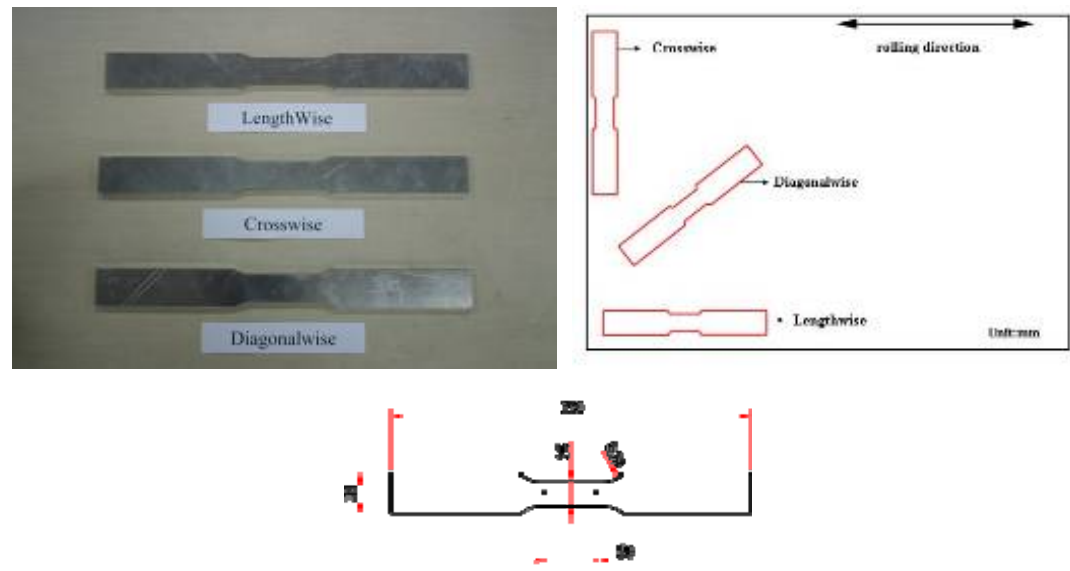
A typical set of ASTM tensile coupon test specimen cut out of the aluminum sheet, used for the present study (in mm)
